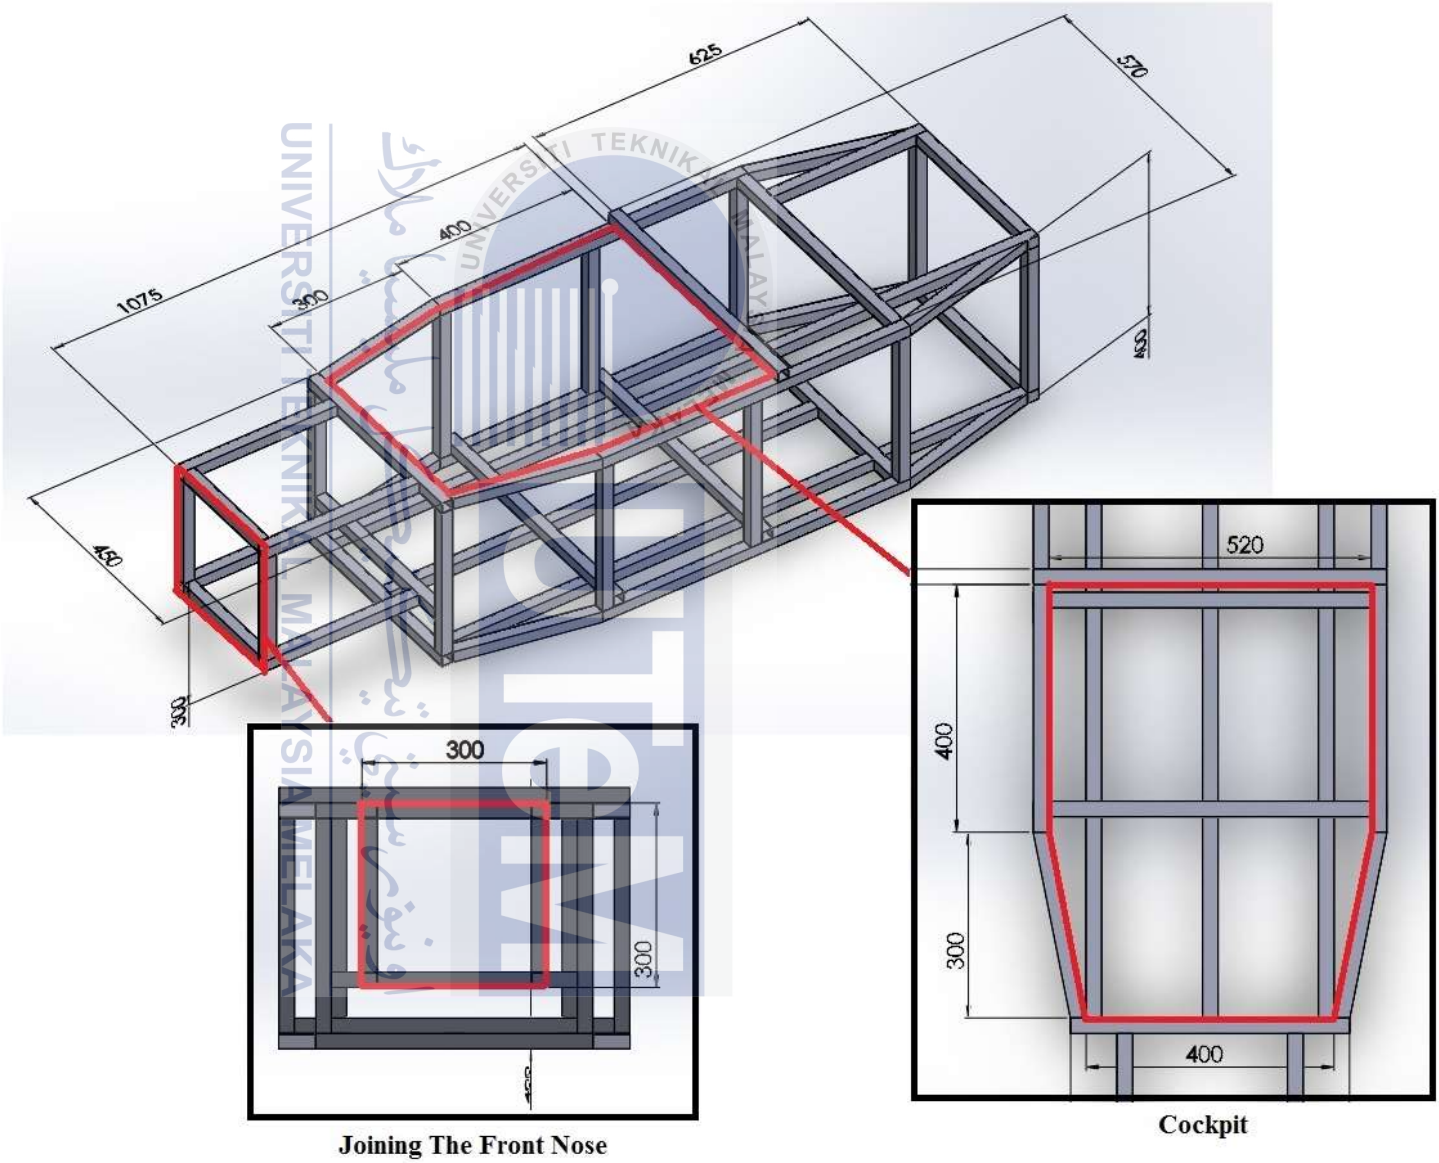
Dimension Of The Joining Part Of The Front Nose And Cockpit
